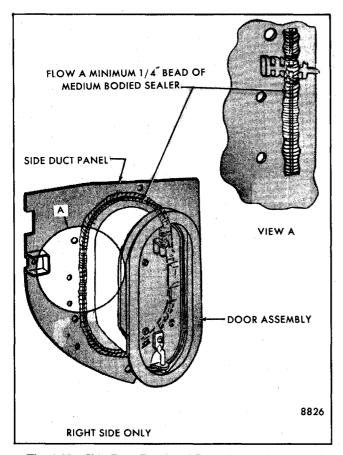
Side Duct Panel and Door Assembly Sealing
